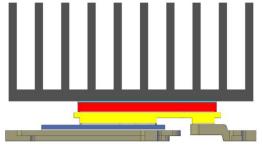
Cross Section of Dual Cool and Heatsink Assembly
